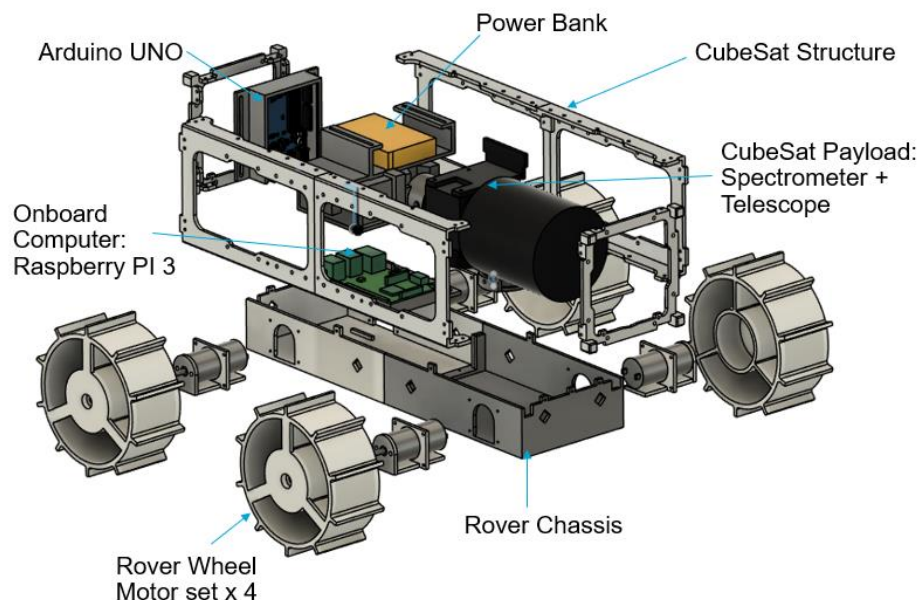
EMEC2 Prototype CAD Model: Exploded View
